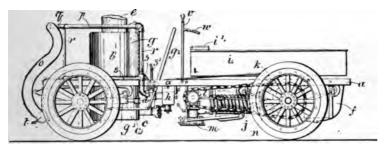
Clarkson steam omnibus. Side elevation of frame and driving mechanism.
